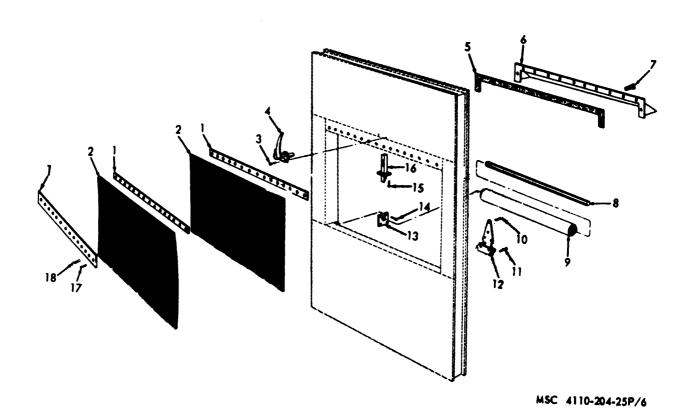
Panel G. INDEX TO PARTS, FIGURE 6
